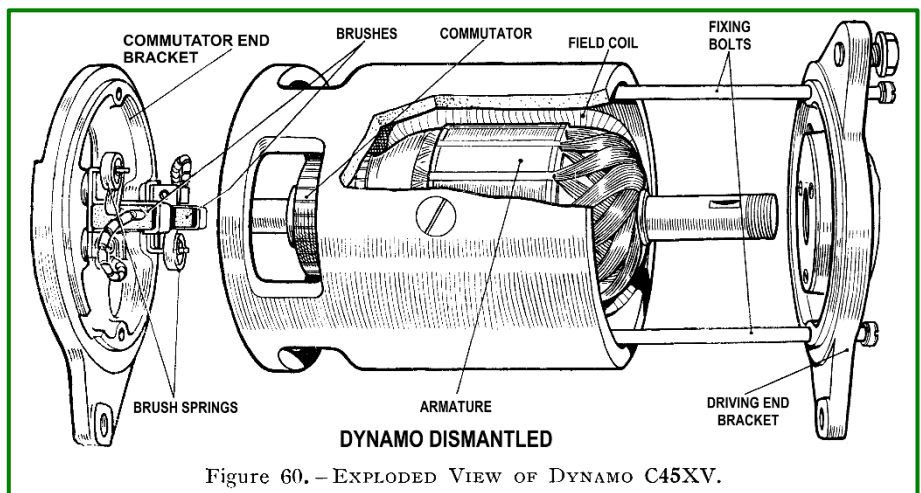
EXPLODED VIEW OF DYNAMO C45XV.
